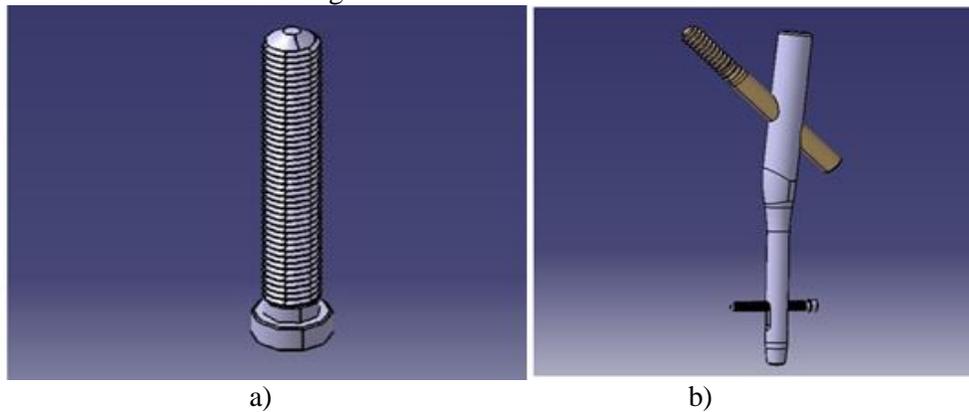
a) CAD model of the distal screw of the Gamma rod; b) The assembled CAD model of the Gamma rod
